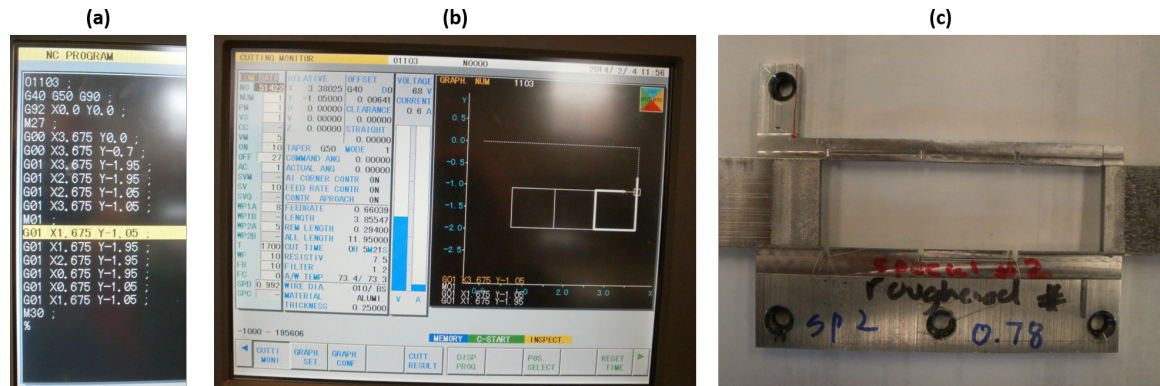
Wire EDM cutting: (a) G-code for sample removal; (b) machine path for sample removal; (c) removed samples showing location where wire came into baseplate.
